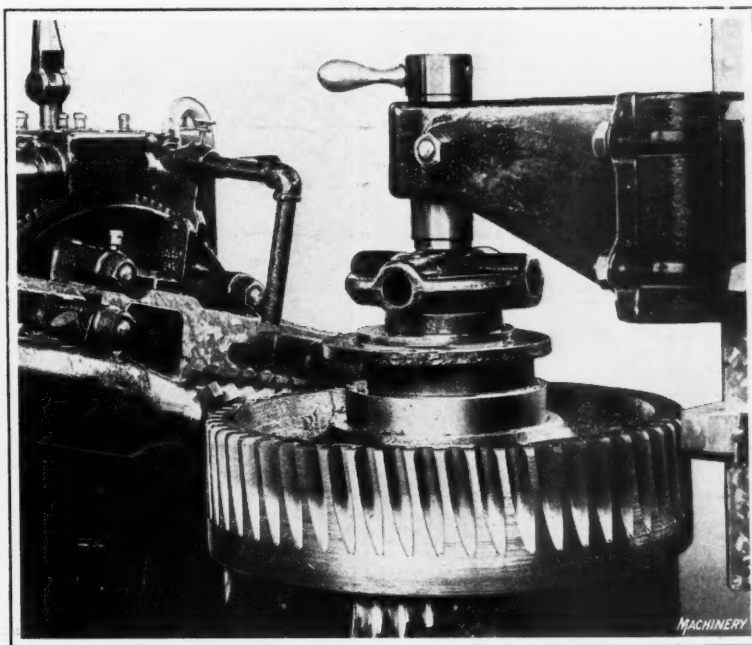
Cutting a Helical Gear on a Hobbing Machine
